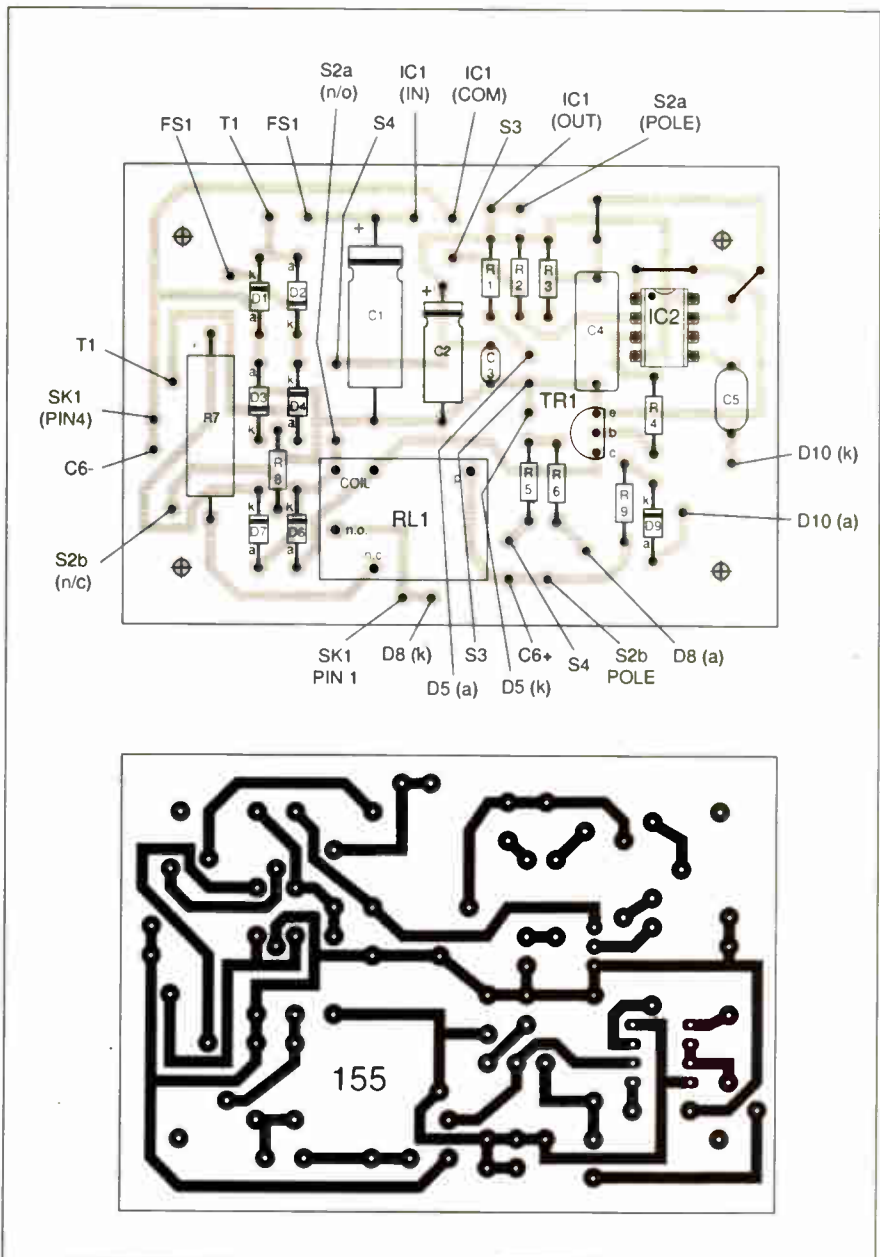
Printed circuit board component layout, interwiring details and full size copper foil master pattern.
